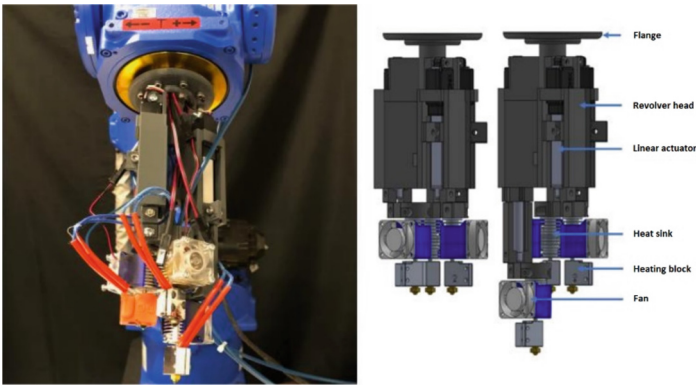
The print head adapted for printing non-planar surfaces using a robotic arm [4]
